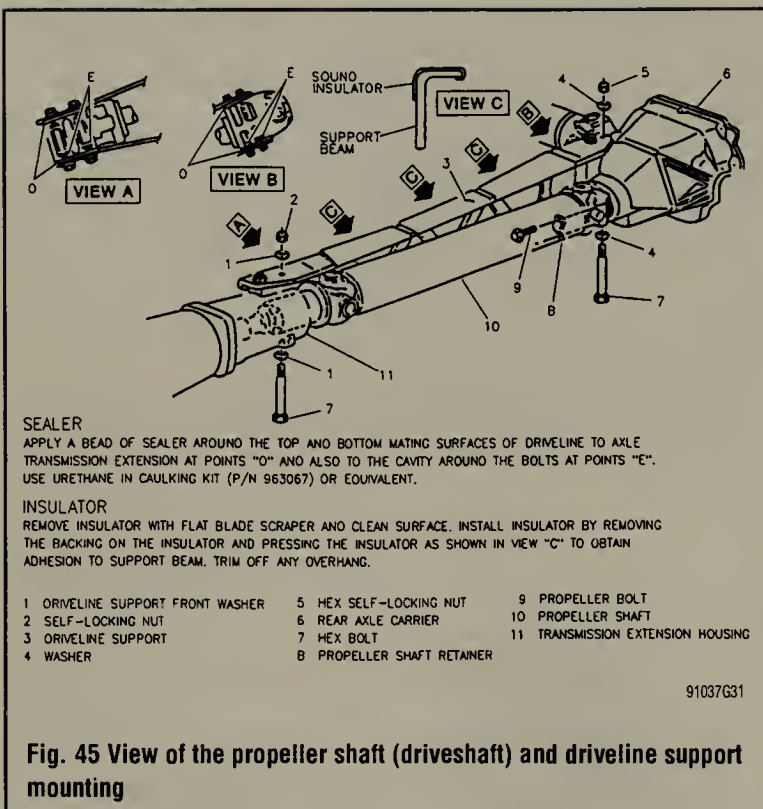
View of the propeller shaft (driveshaft) and driveline support mounting
